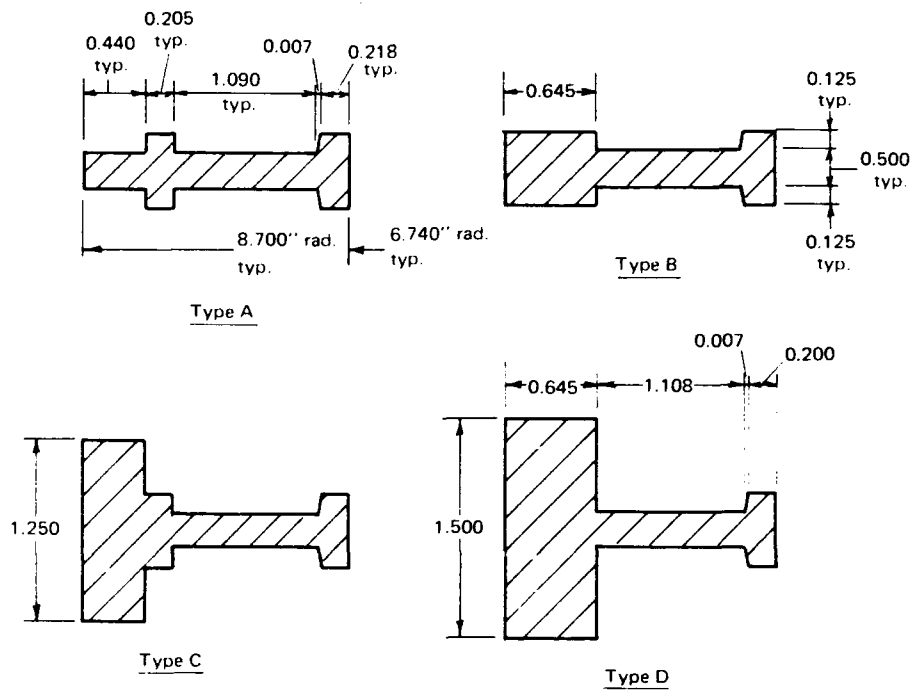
Dimensions of simulated equatorial lock joint assembly.
